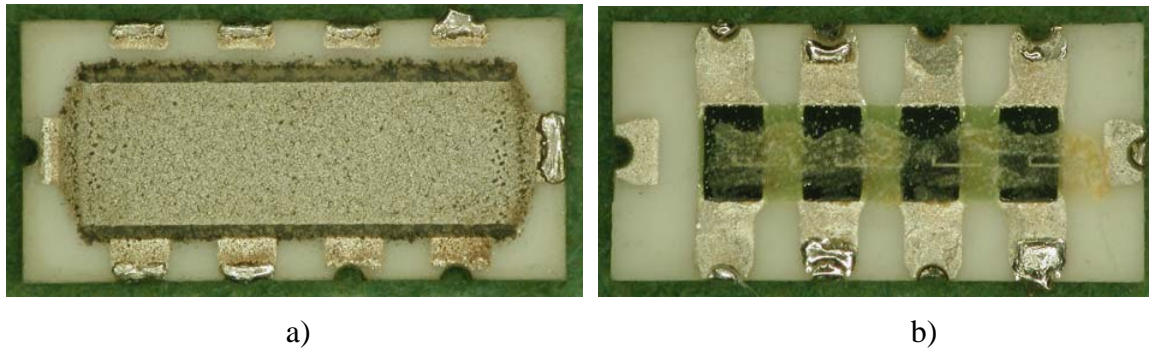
Top (a) and bottom (b) views of the part after coating removal.
